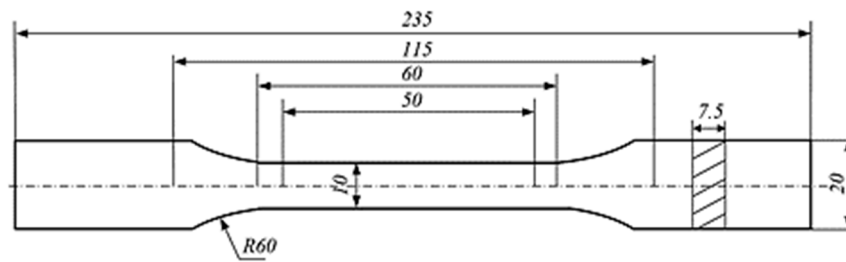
Dimensions of the specimens for the static tensile test in accordance with standard [31,37].
